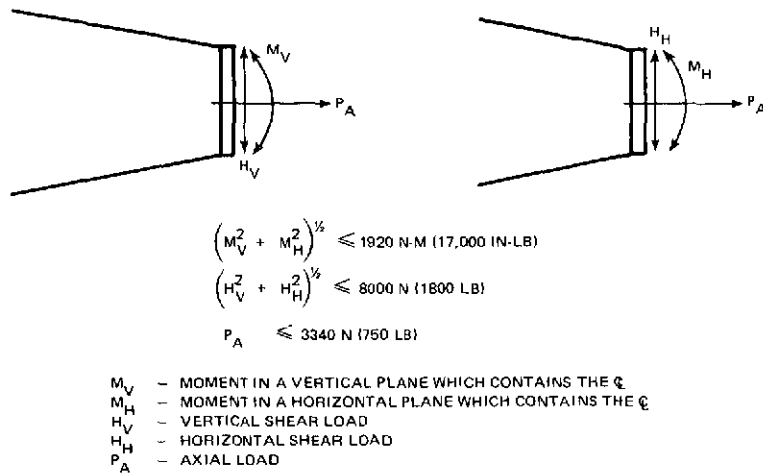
JT8D-100 Allowable Limit Loads for Primary Exhaust Case Flange
